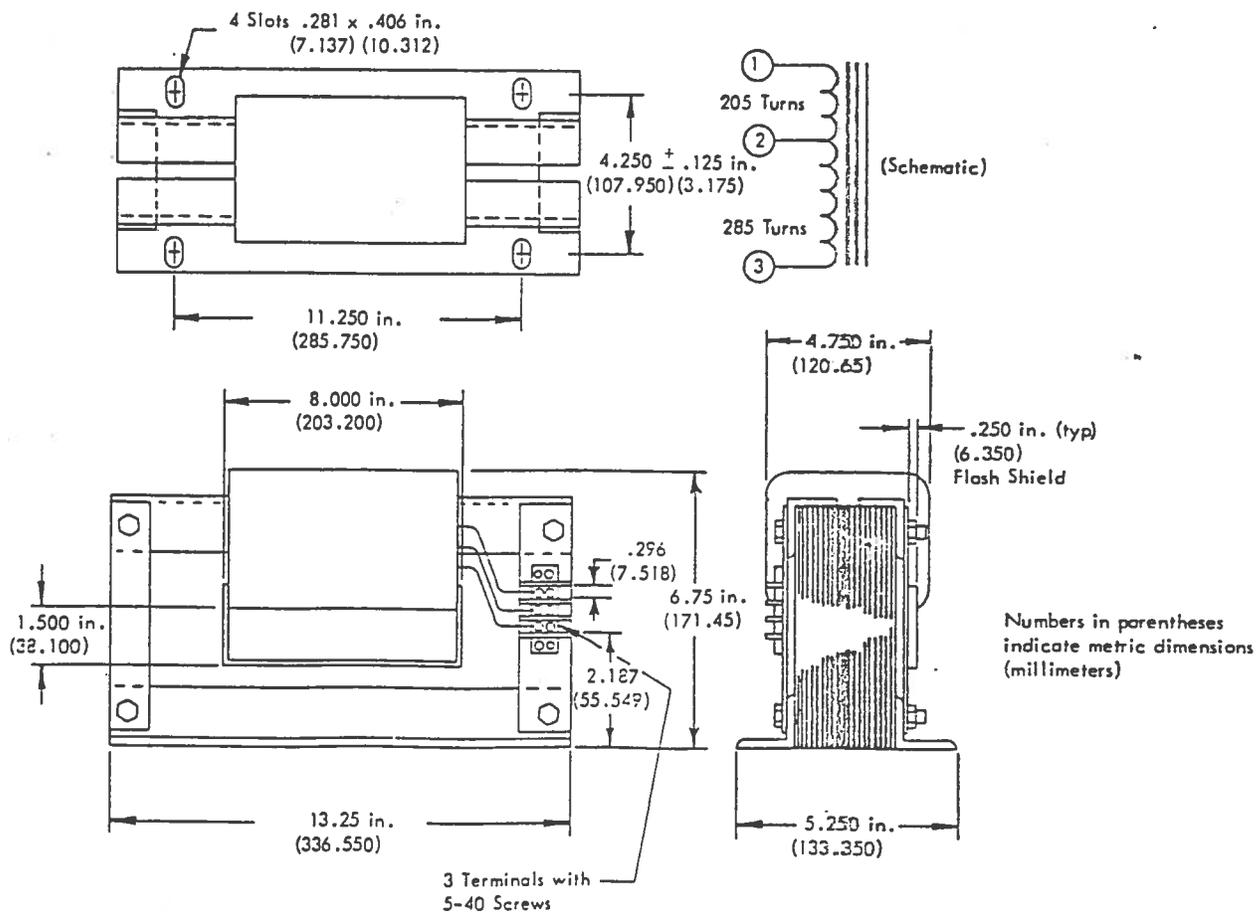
B. Outline Drawing - Current Transformer Pt. no. BE 16866-001
